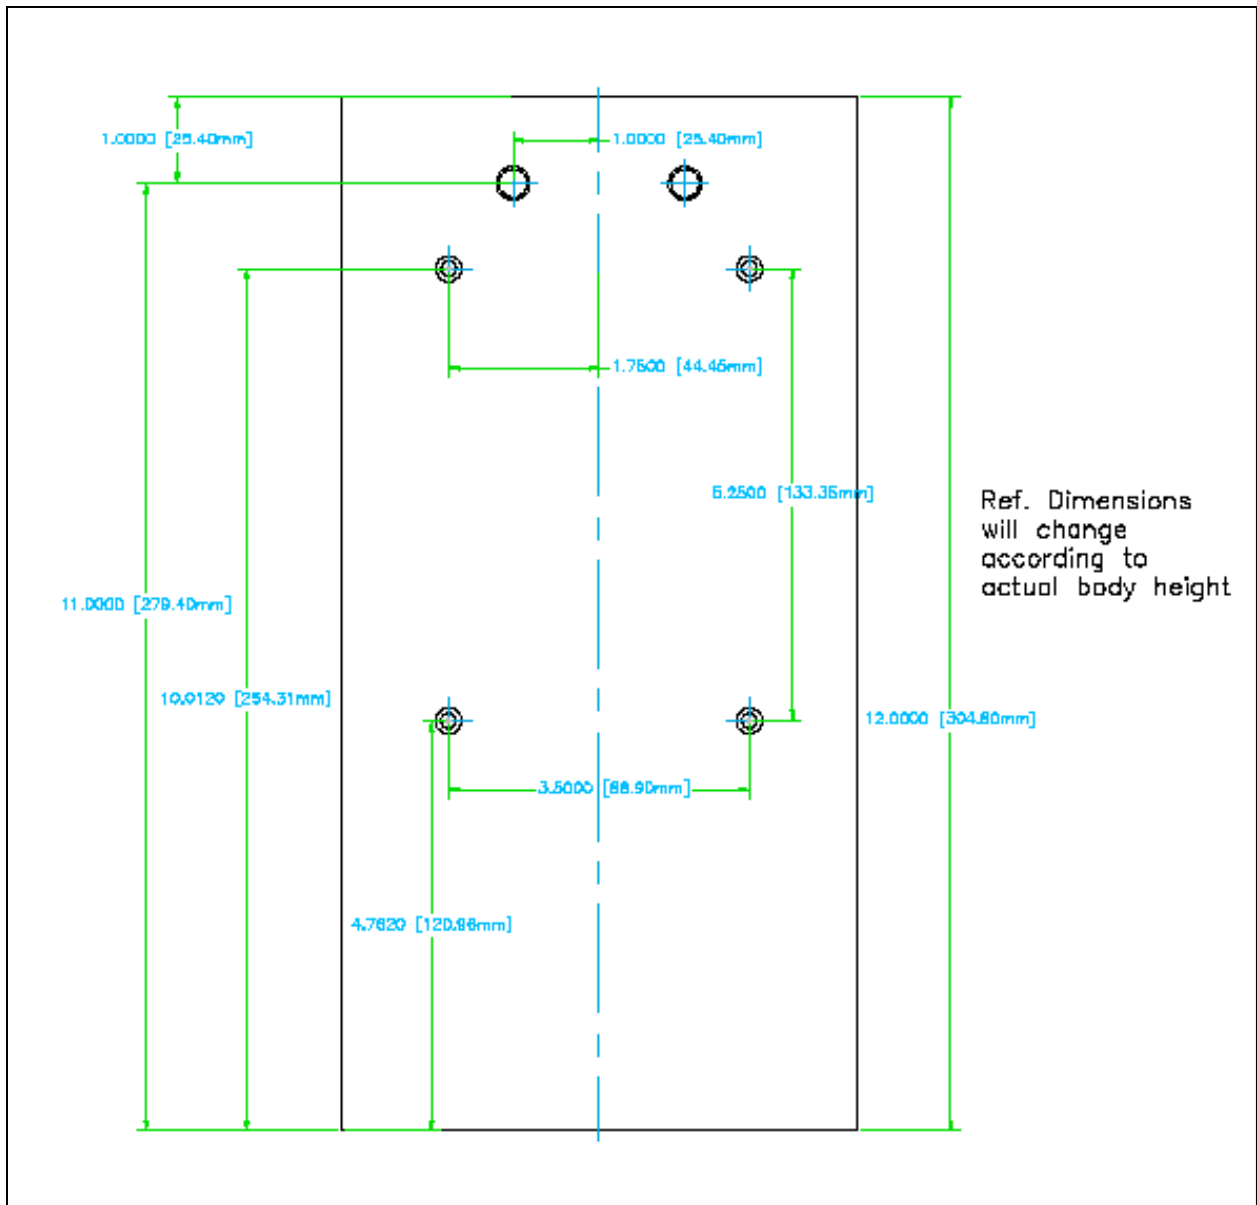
(c) Design for holes on fourth side (Side #4) of payload body for mounting microcontroller PCB
